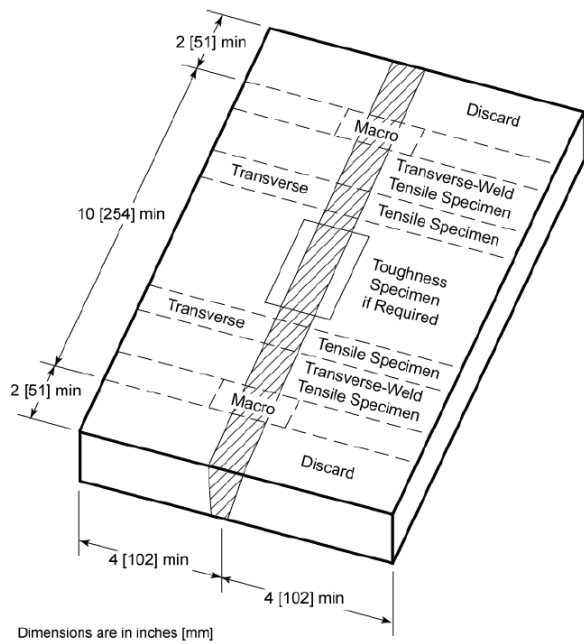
Location of Square Groove Weld Test Specimens—Plate [3]
